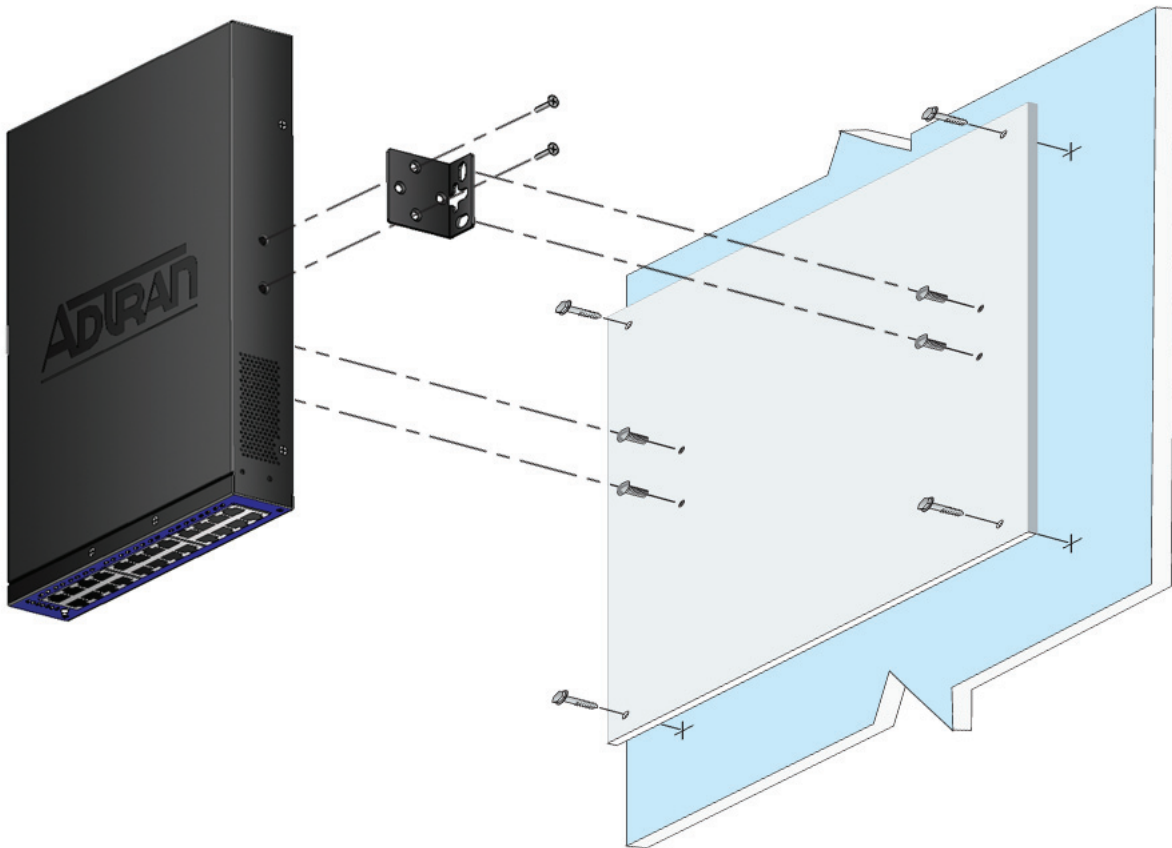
NetVanta 1531/1531P/1534/1544 Wallmount Installation
